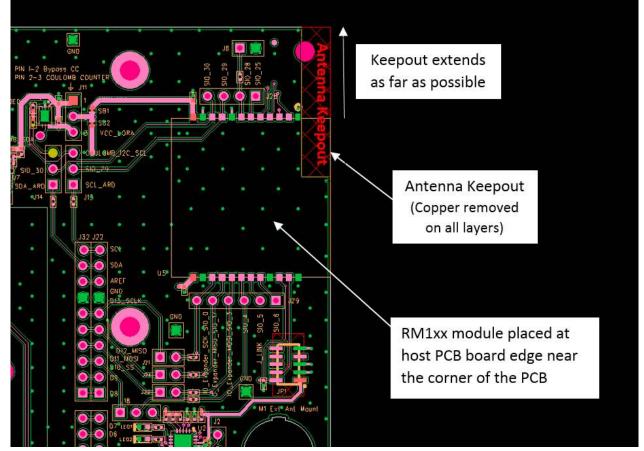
Antenna keepout on DVK-RM1xx PCB (shown in red) with RM1xx module placed near the corner.
